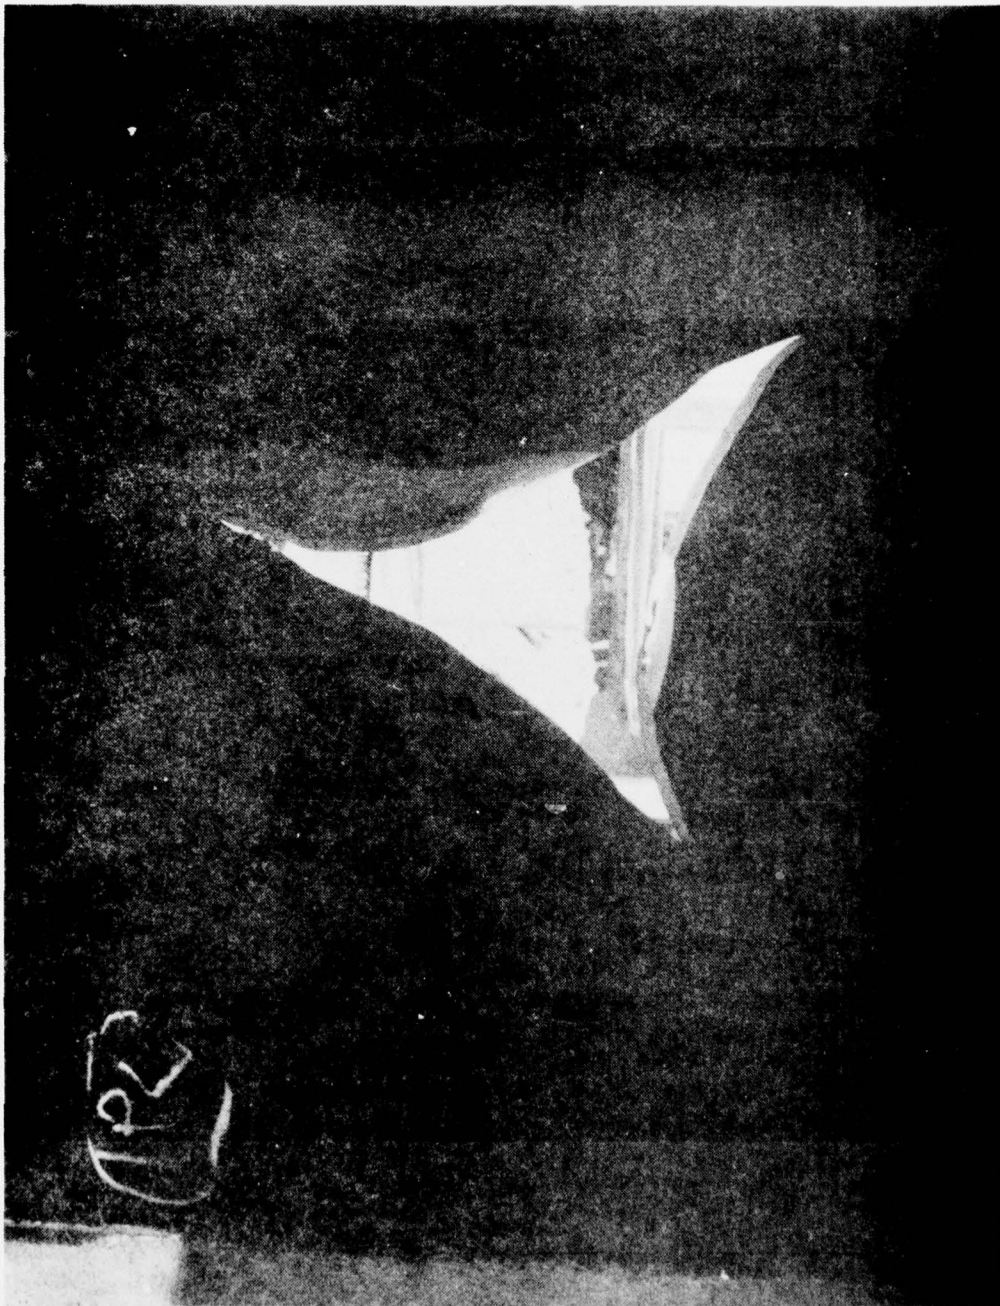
Test No. 22, 0.25-in. Thick T-1 Steel Target — Back Closeup
